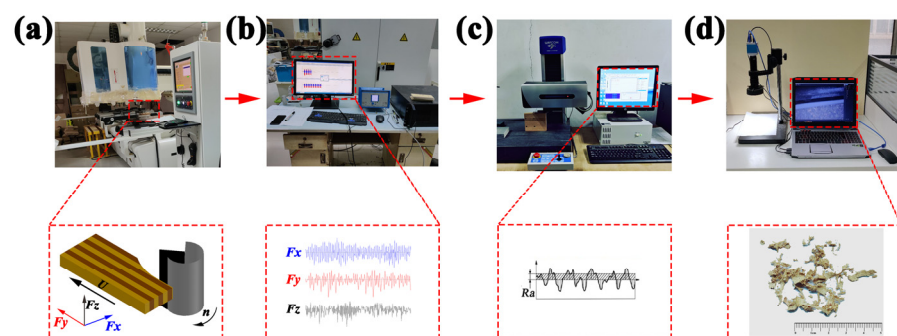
Test instruments: (a) machine tool; (b) dynamometer; (c) surface roughness measuring instrument; (d) micrometer.
